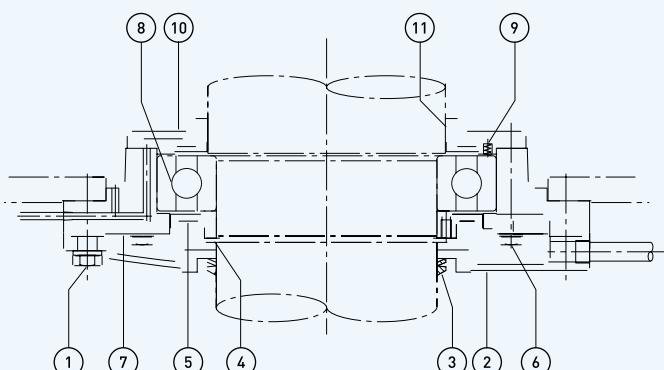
Replacement Procedure for Upper Bearing(Upper Side Bearing Assembly Drawing)
